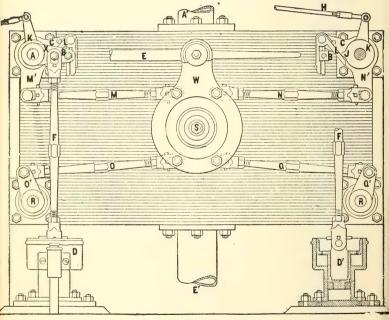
VALVE GEAR OF A CORLISS ENGINE.
